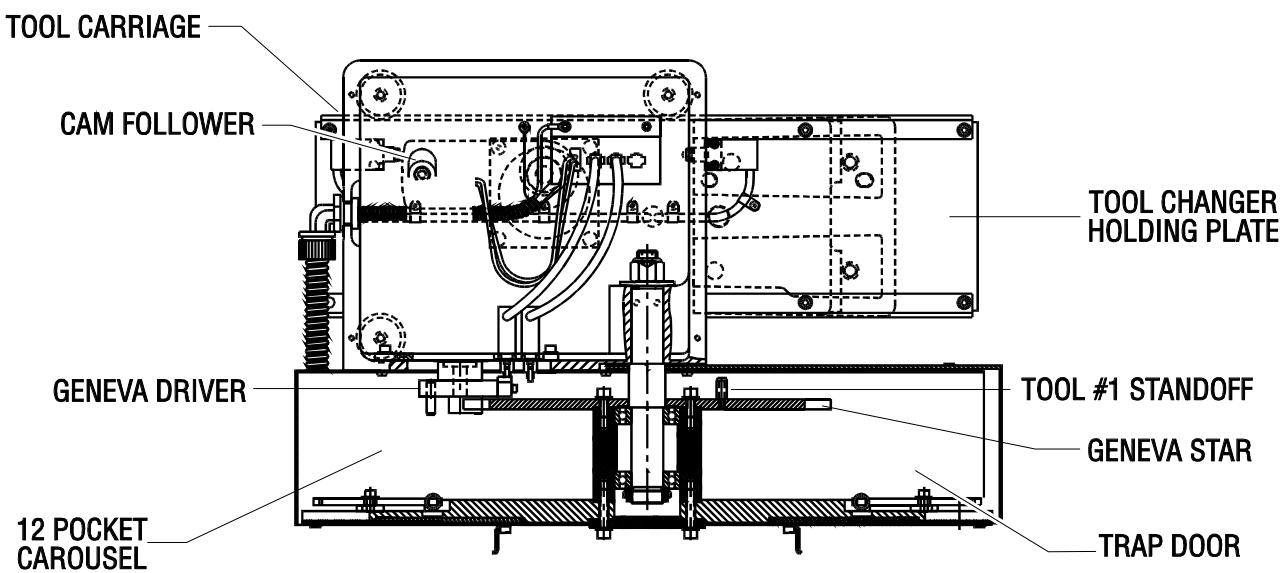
Automatic Tool Changer - Mechanical Assembly (Side View)
